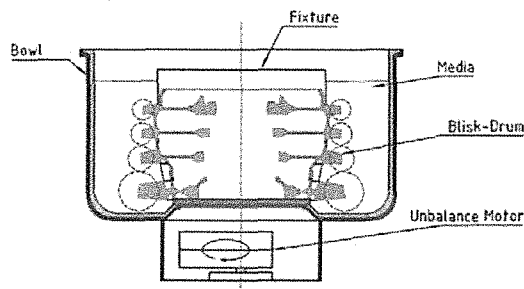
schematic view of a vibrofinishing (drum blade polishing) equipment [5]
